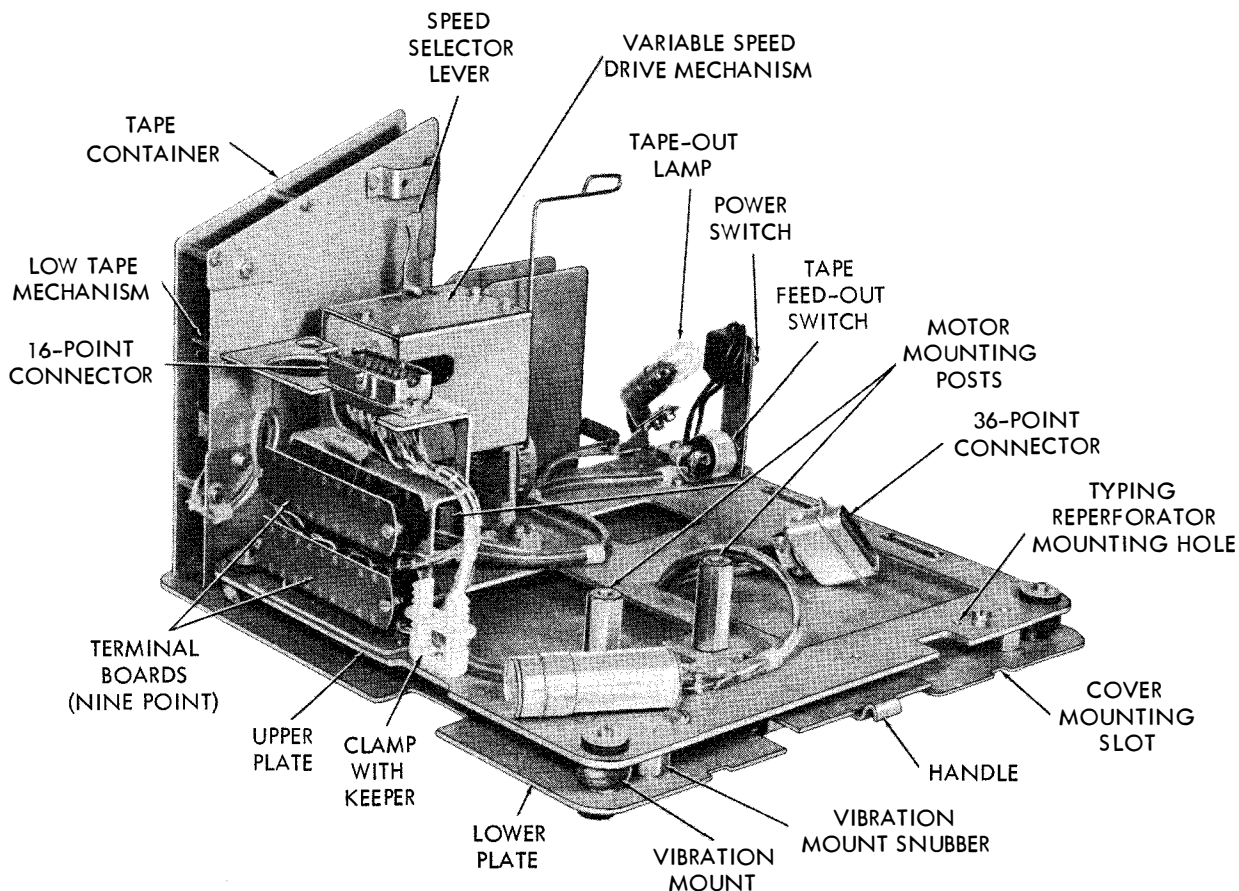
TT-192/UG and TT-274/UG Double Plate Base (Rear View)
